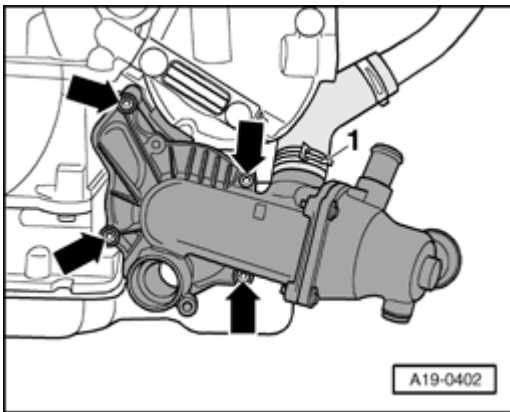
Disconnecting Coolant Hose & Removing Coolant Pump
